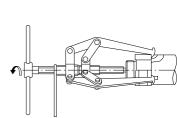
Removal of Inner Ring Using Withdrawal Tool (2)
